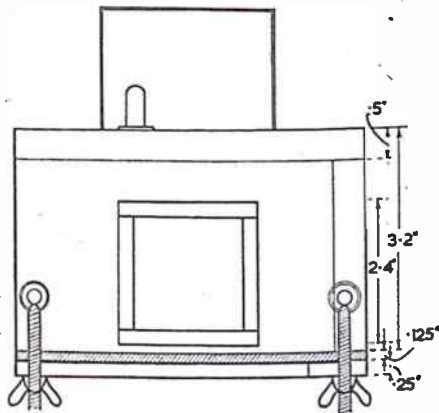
Front view showing method of fixing base to casing. The shaded portion is 1/8" gasket rubber to make the joint watertight.
